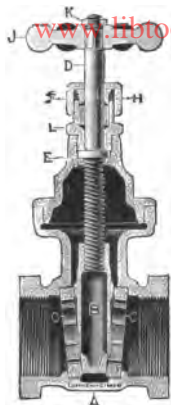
Gate Valve, Inside Screw, Non-rising Stem.
